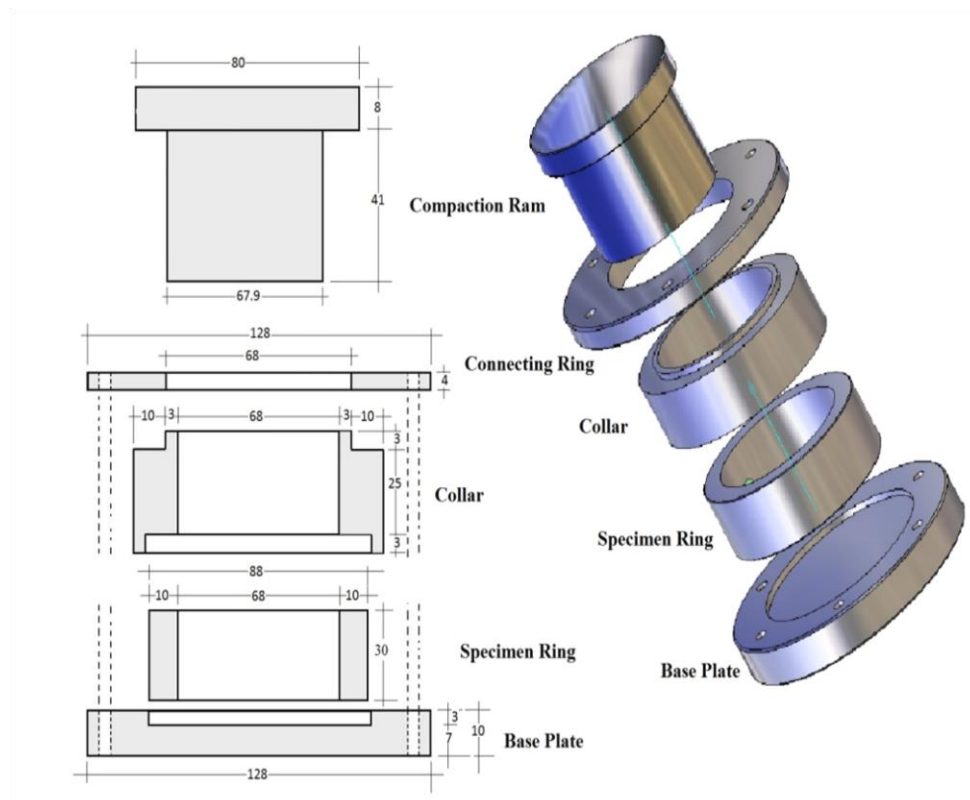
The mechanical drawings of compaction mould compatible with specimen ring of the modified device.
